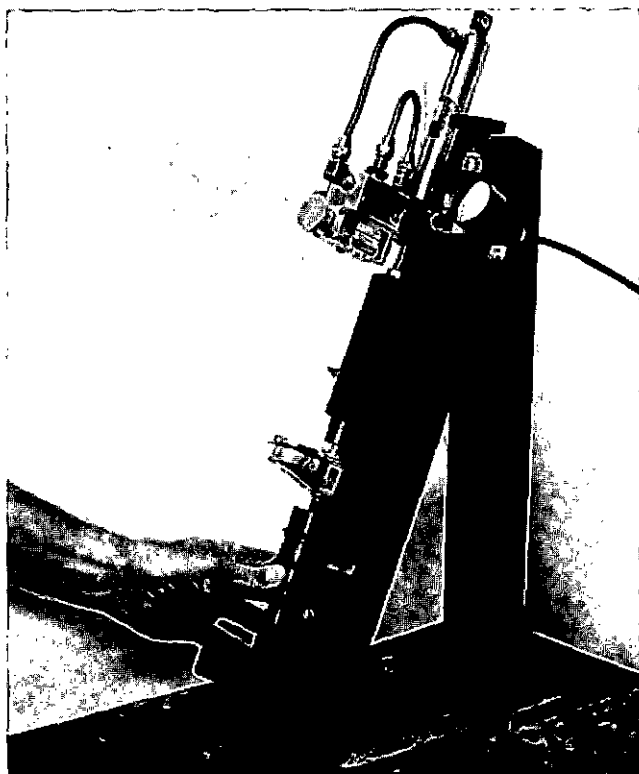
, (F60302). Rotate the injector adapter and observe the reading
